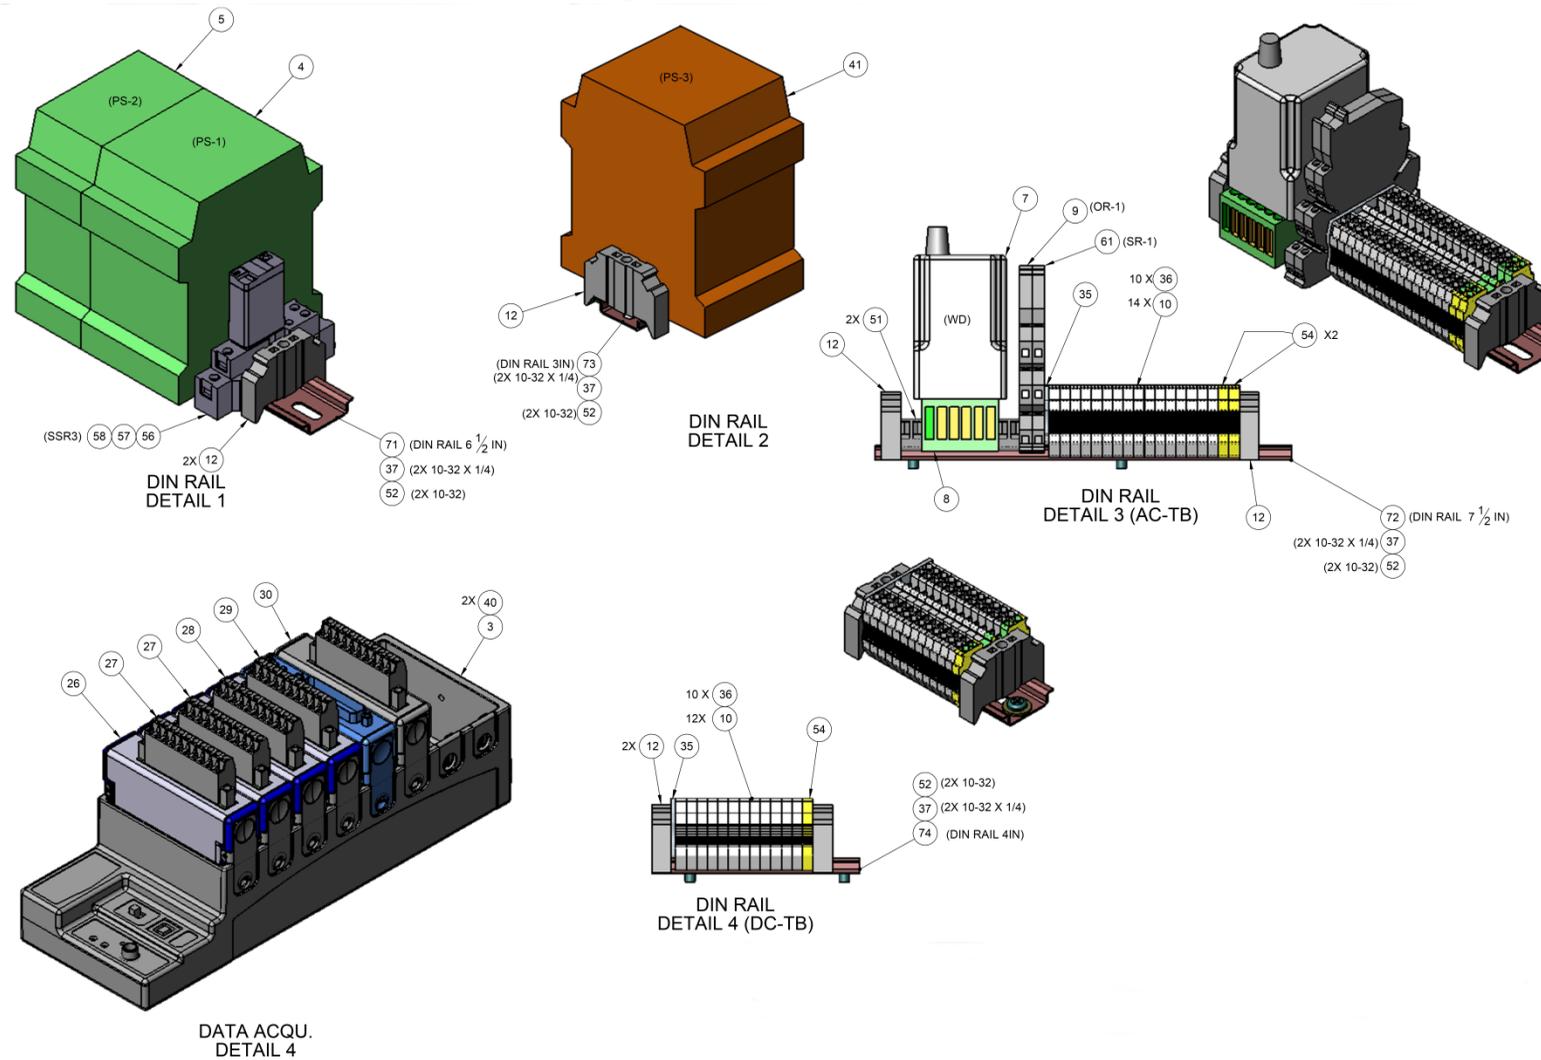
iX77 Electrical Assembly, Din Rail Components
